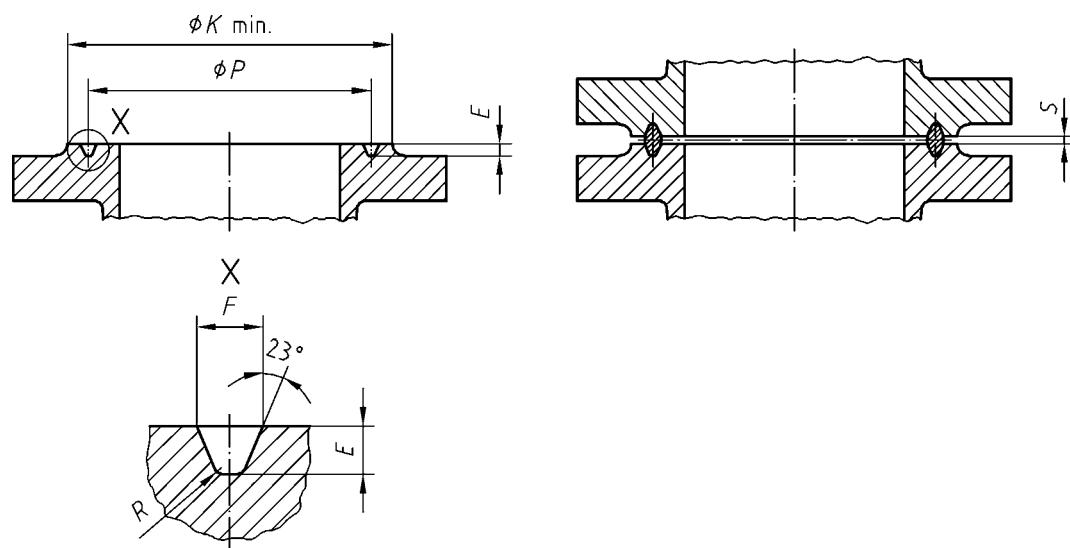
Dimensions of ring-joint facings Type J (all Classes) (see Table 6)
